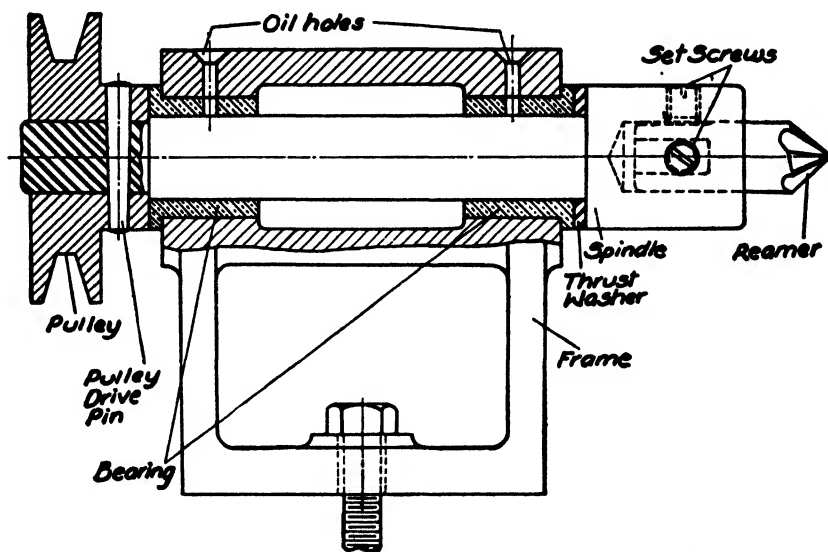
Burring or Countersinking Head—Plain Bearing Design.
